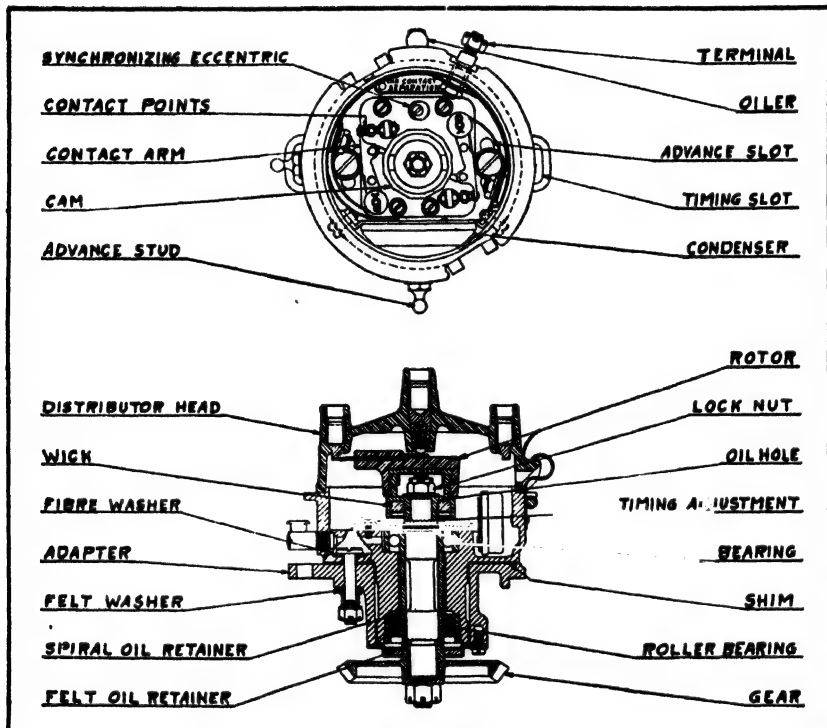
Delco Battery Distributor Assembly Used on Packard Model 2A-15000, and 2A-2500 Aircraft Engines.
